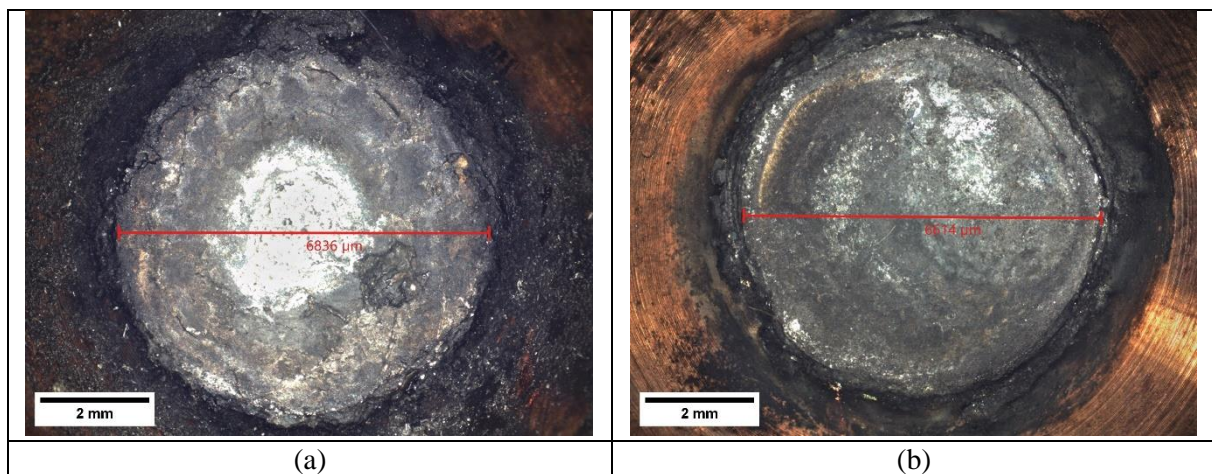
Digital microscope images showing degradation of the surfaces of electrode used in welding of (a) GA and (b) GI coated steel
